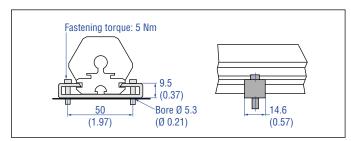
Mounting clamps (part no. 400 802) with cylinder screw M5×20
